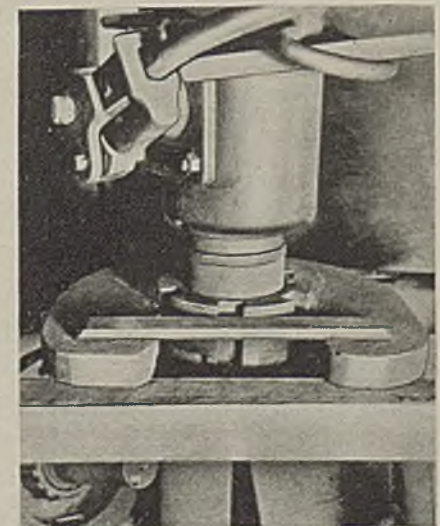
Plate Spot Welded to Center. Arrows Point to Welds
